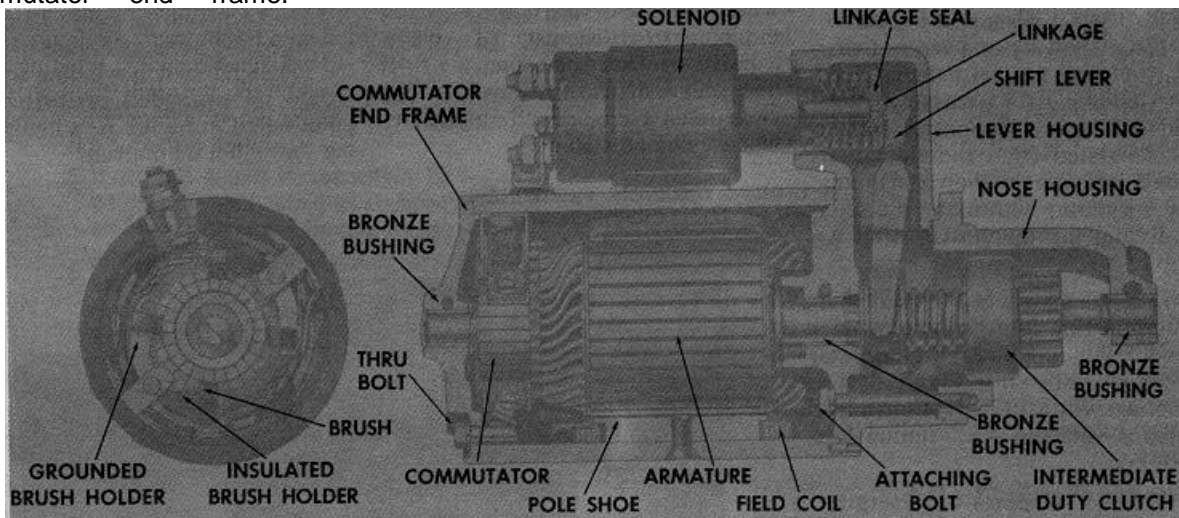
Cross-sectional view of motor with intermediate duty clutch. Note different attaching bolt construction than Figure 4.
